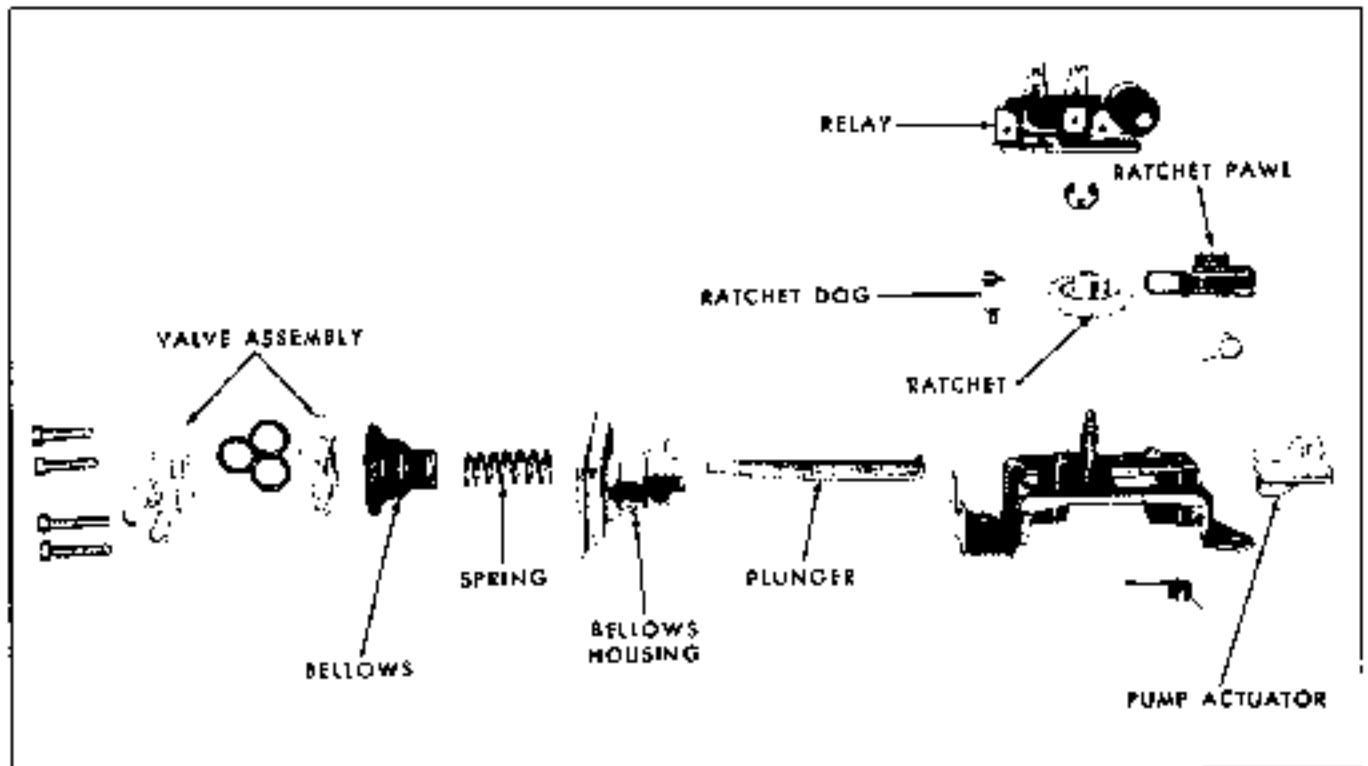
Exploded View Pump Assembly—Tempest and Firebird
